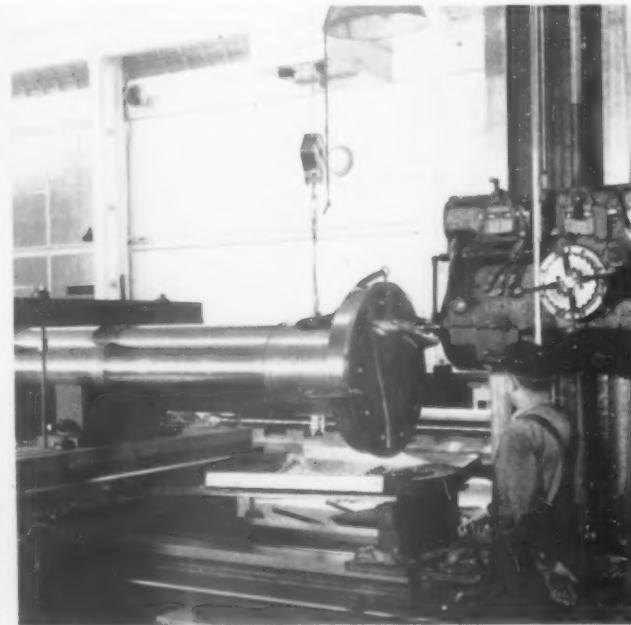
Drilling end flange of a 10-ton ship line shaft. A templet jig clamped to the flange, spaces the drilling, a slip bushing being moved from hole to hole until all are drilled. The holes are subsequently reamed, in the same setup, to large diameter. Overhang is supported as shown in Fig. 1.
